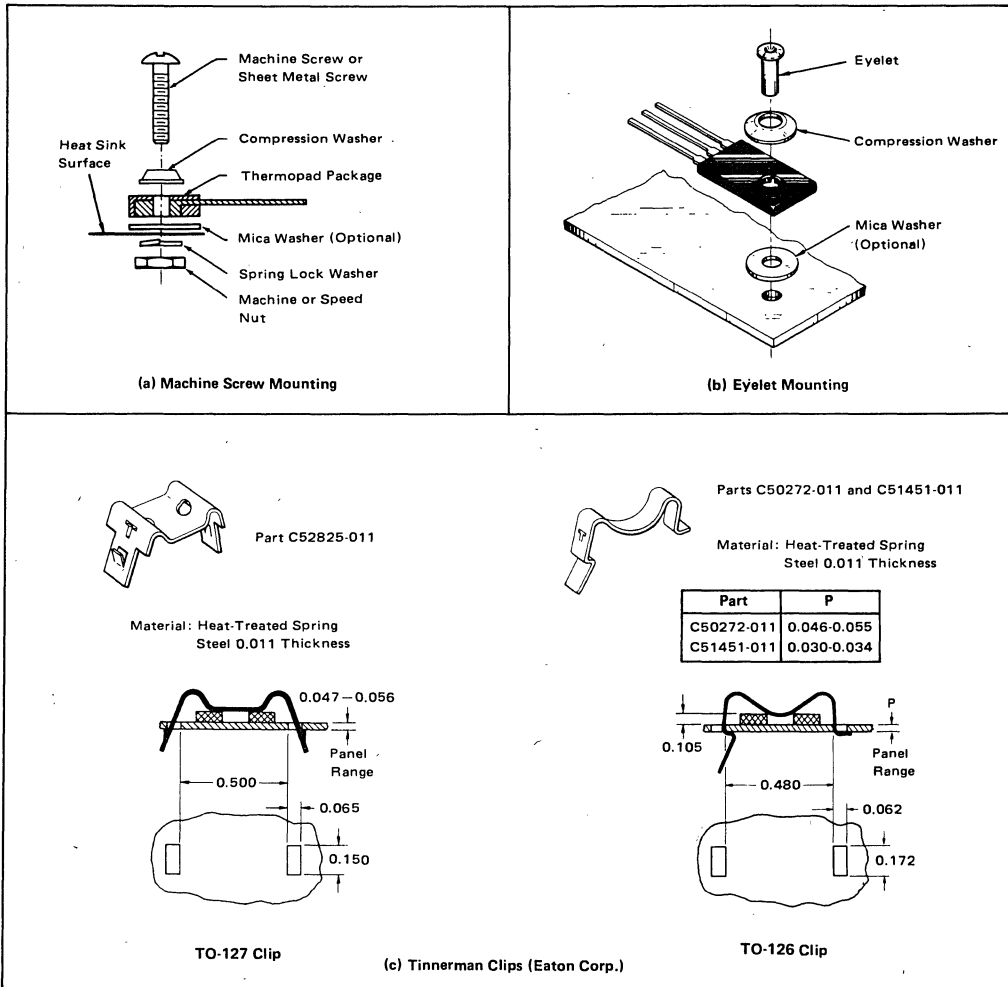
Recommended Mounting Arrangements for TO-126 and TO-127 Thermopad Packages
